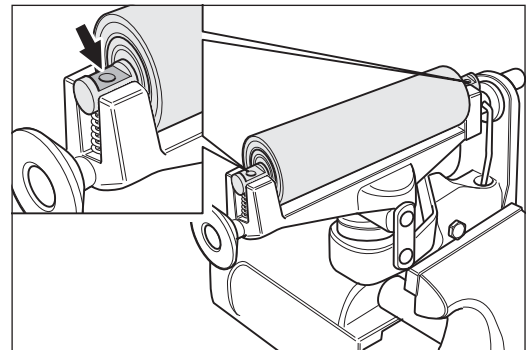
Insert the new tensioning roller, ensuring that the surfaces on the shaft ends are pointing upwards.
